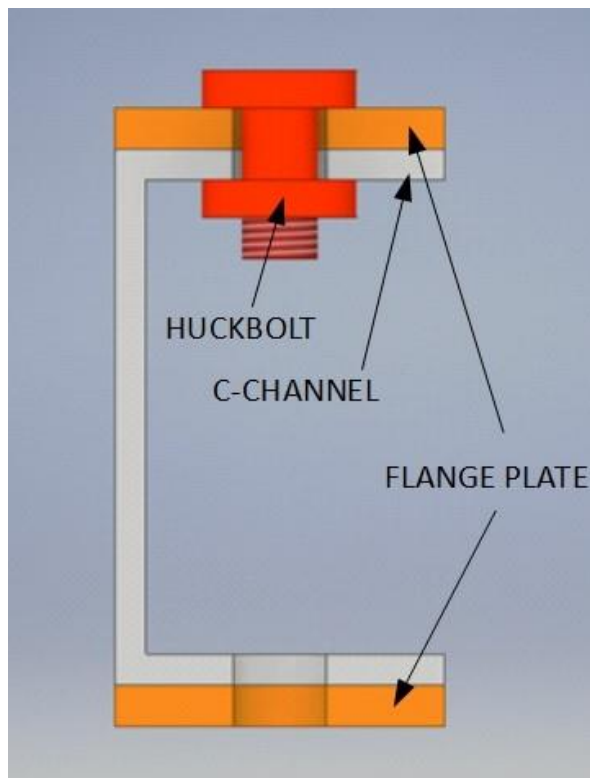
The C-channel from the new design, a HuckBolt, shown in red, connects the C-channel to the top plate and bottom plate.
